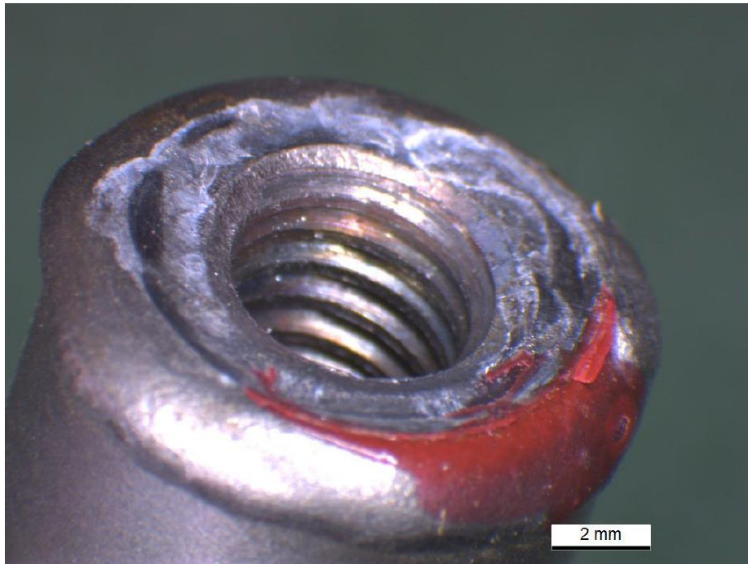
Forward right hand steering rod end, free of fracture marks and corrosion, surface markings are an attribute of assembly.
